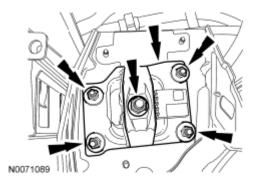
Locating CMS Wire Connector Bracket And Nut Courtesy of FORD MOTOR CO.
